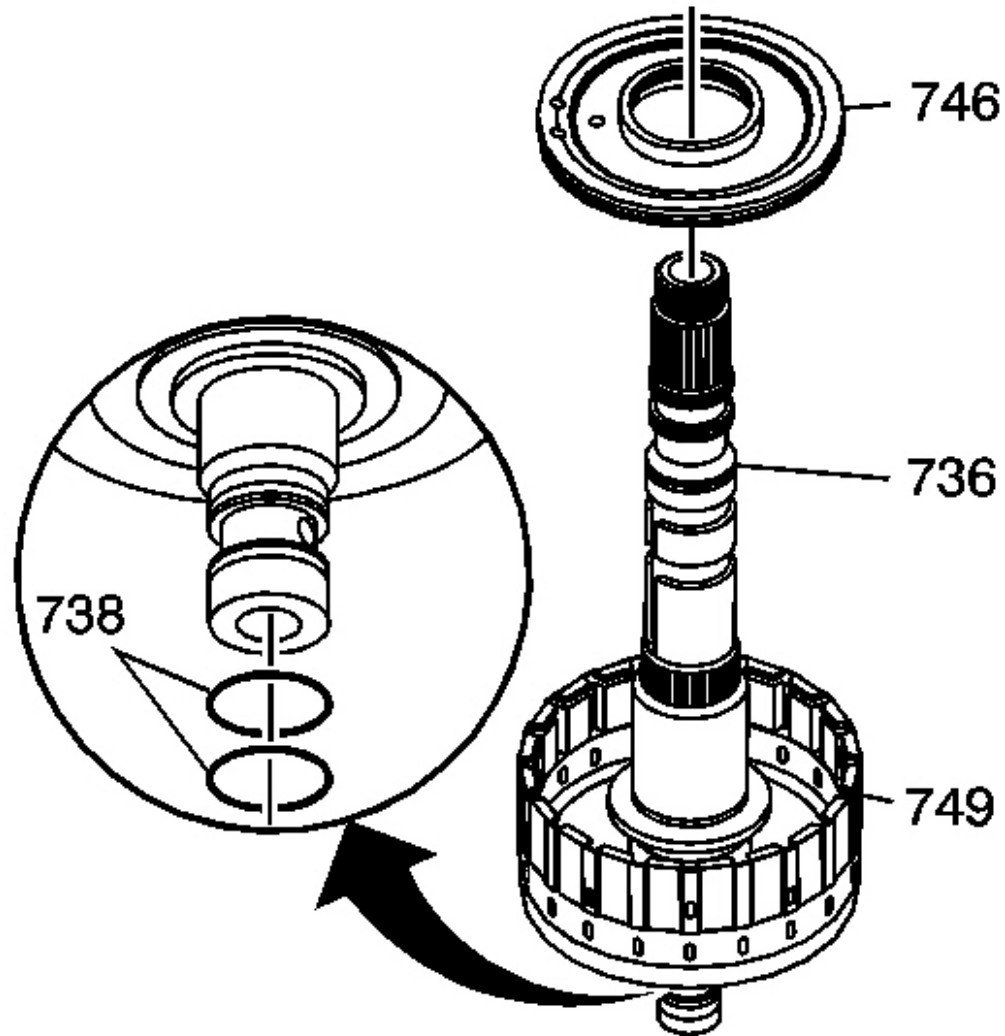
1st/2nd Clutch Shaft & Fluid Passage Seals
